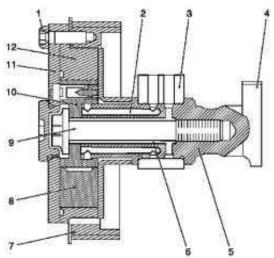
Cross-section of oil sending control camshaft drive intake valves: 1 - attachment bolt - a cover of the regulator of camshaft 2 - oil pipe to the chamber "A" regulator of camshaft 3 - block bearing camshaft, 4 - cams, 5 - camshaft; 6 - oil feed to the cameras "B" regulator of camshaft; 7 - toothed belt pulley 8 - separation chambers "A" and "B", 9 - bolts fastening the regulator of camshaft, 10 - rotor, 11 - a cover of the regulator of camshaft, 12 - Stator
